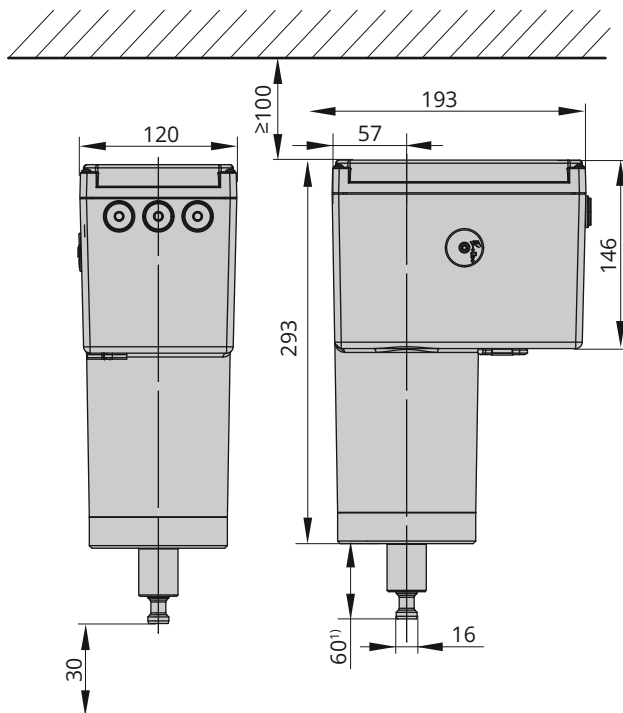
Dimensions in mm · Type 3374-35, form A version
